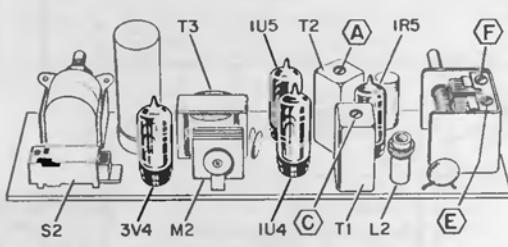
Top View of Chassis 4W2. Tube Locations and Alignment Points Shown.
